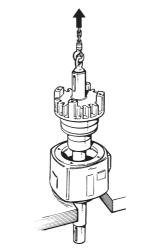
(The figure shows 5F and 6F but applies to all Bearing Assemblies) When dismantling the Bearing Assembly it should be placed on trestles or over a hole in the work bench.
